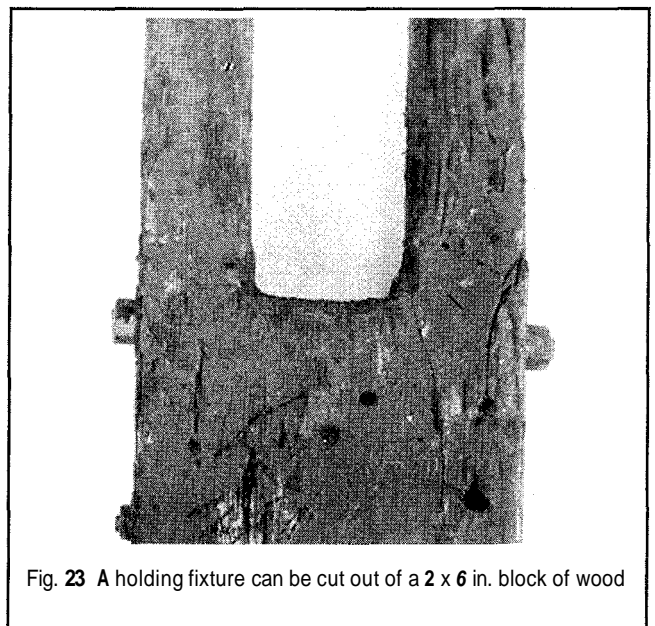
A holding fixture can be cut out of a 2 x 6 in. block of wood
